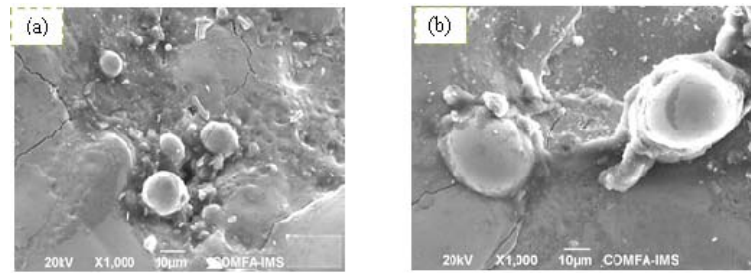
Cracks on of the hot-forging die surface (a), Ti electrode (b), Cu electrode.
